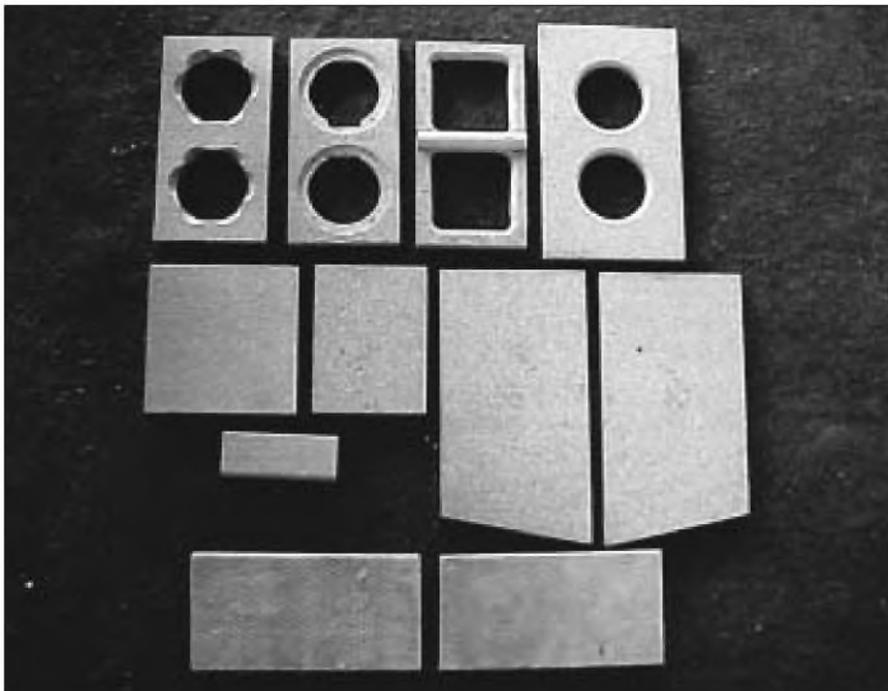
Array of pieces to build boxes #9 and #10—see text for layout.
